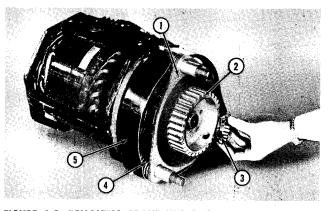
REMOVING BRAKE HUB LOCKNUT 1. Floating Plate 3. Locknut 5. Cover Band 2. Brake Hub 4. Spring
